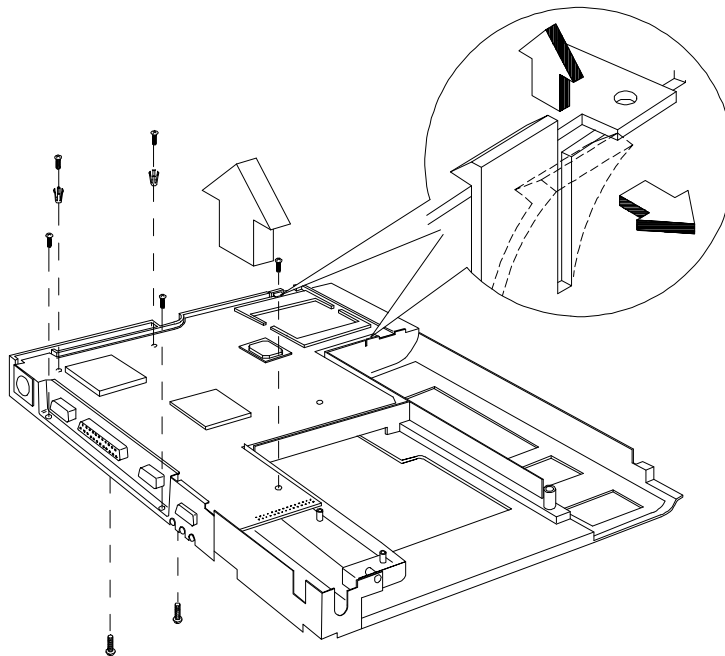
Detaching the Motherboard from the Inside Assembly Frame
